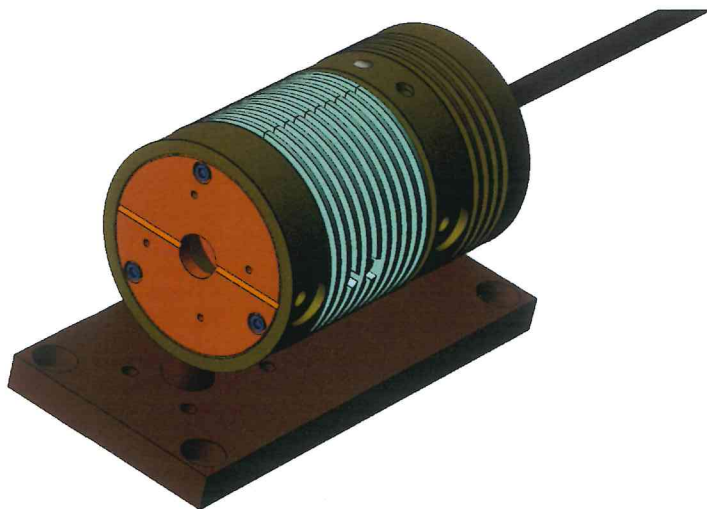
Mounting of a cooled Laser Head for best heat dissipation
